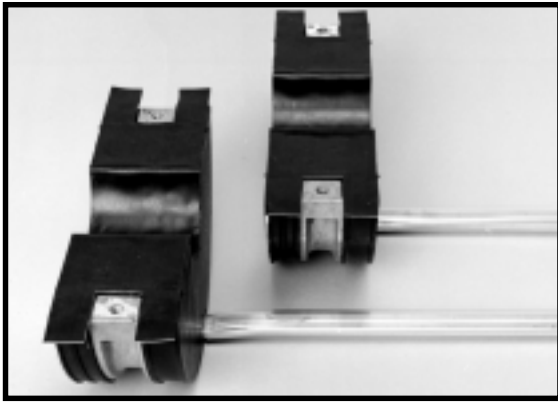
COMPLETED PREPARATION OF END PLATE HALVES
